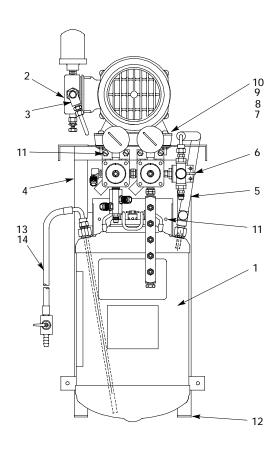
AIR COMPRESSOR AND TANK KIT
